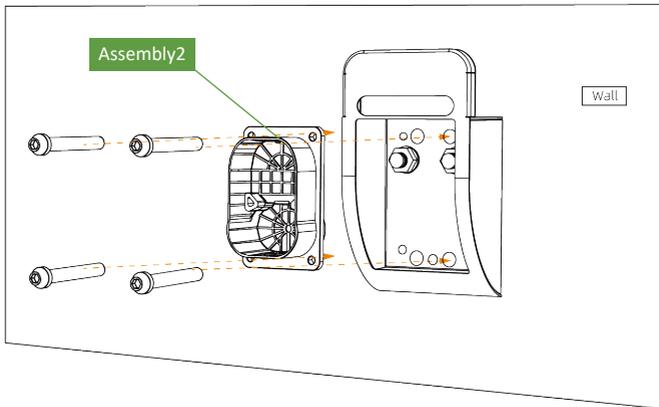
schematic diagram of corresponding holes of charging connector placement assembly2
